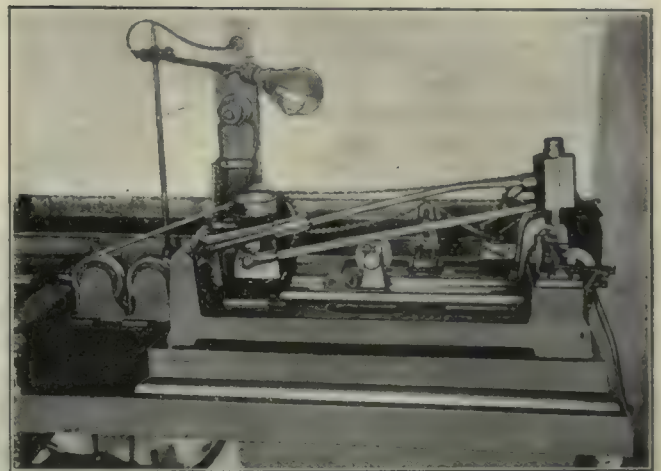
THE STANTON ALTERNATE IMPACT MACHINE
